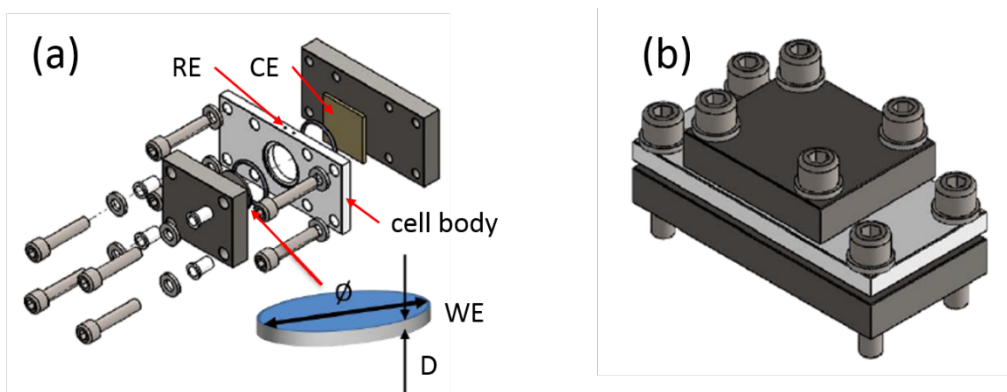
Separator-free cell (a) exploded view and (b) assembled. [92]
